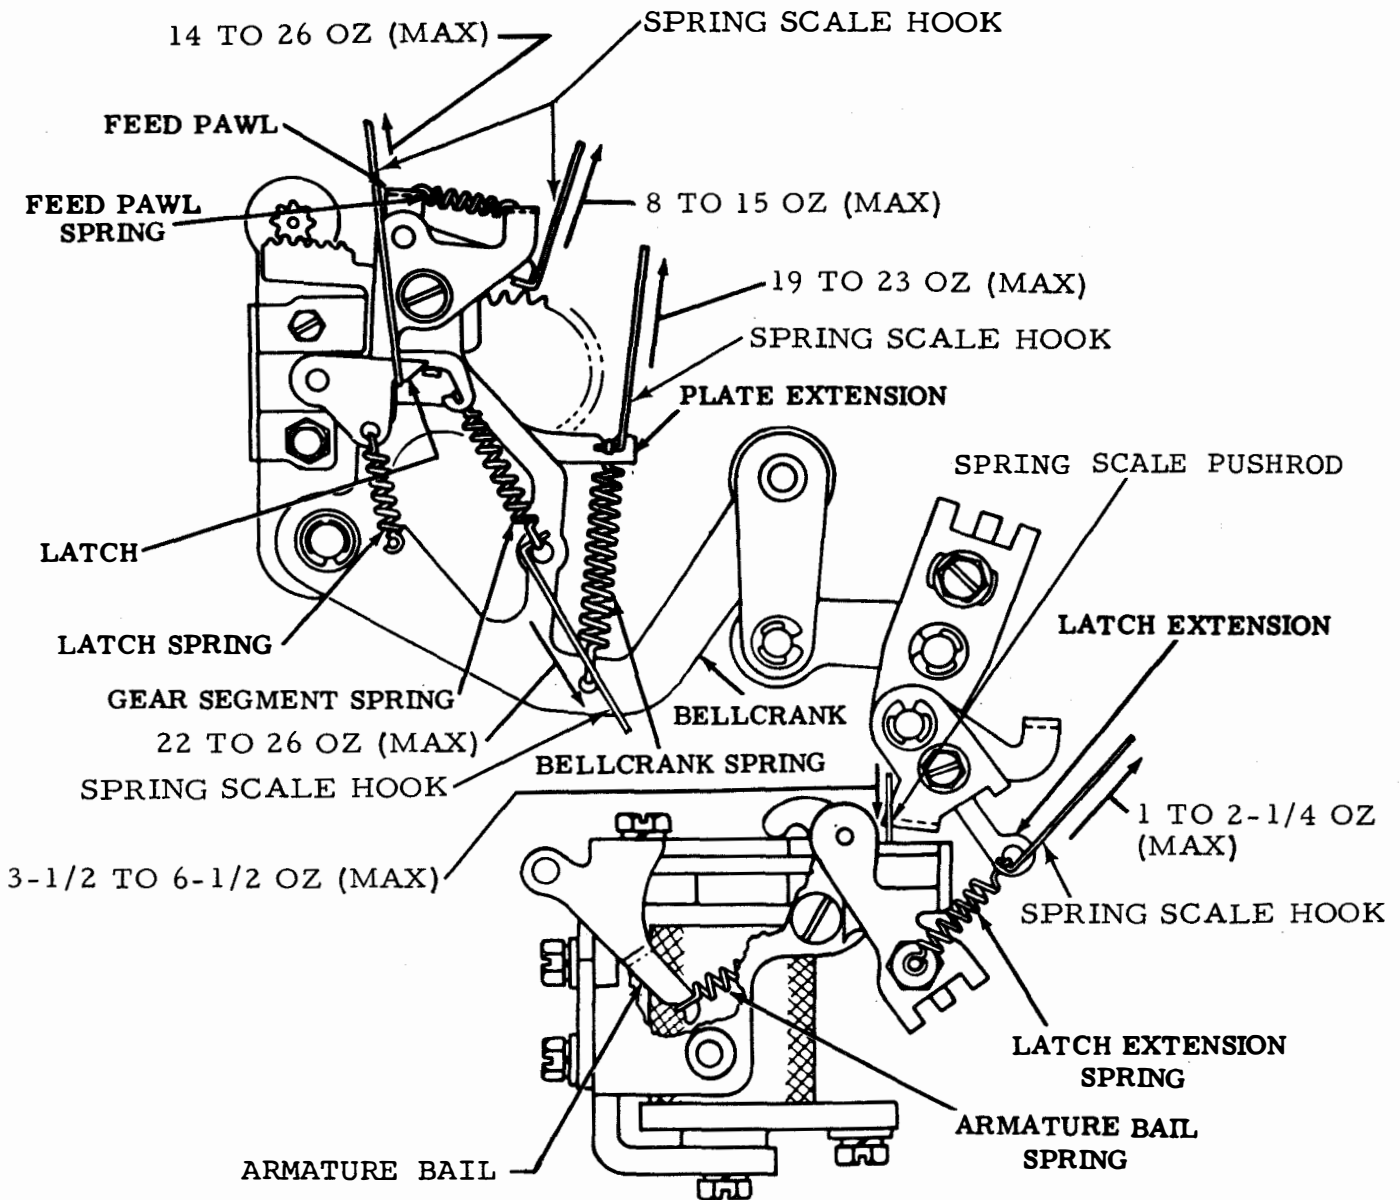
Latch, Feed Pawl, Bellcrank, Gear Segment, Armature Bail, and Latch Extension Springs (For Chadless Tape), Perforator
